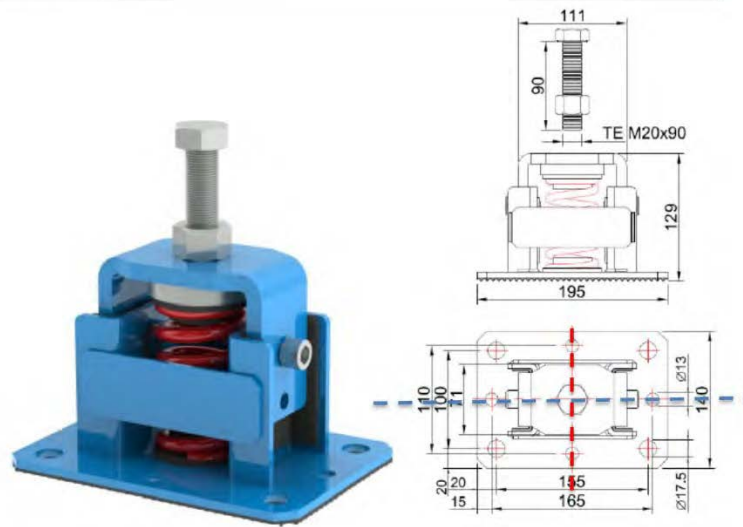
Image and drawing of one support under testing (example), to show parallel (blue line) and perpendicular (red line) direction for shear tests.
